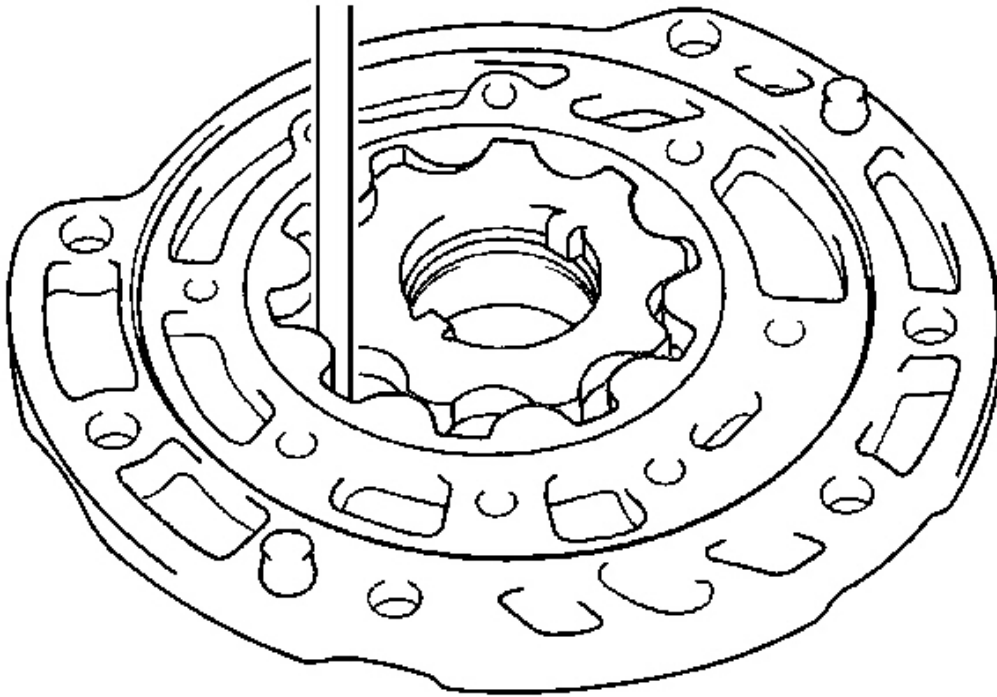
Measuring The Tip Clearance Between Driven Gear Teeth
